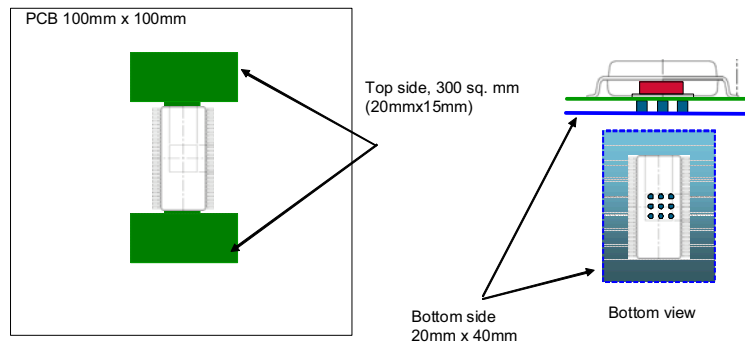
PCB with Top and Bottom Layer Dissipation Area (Dual Layer)
